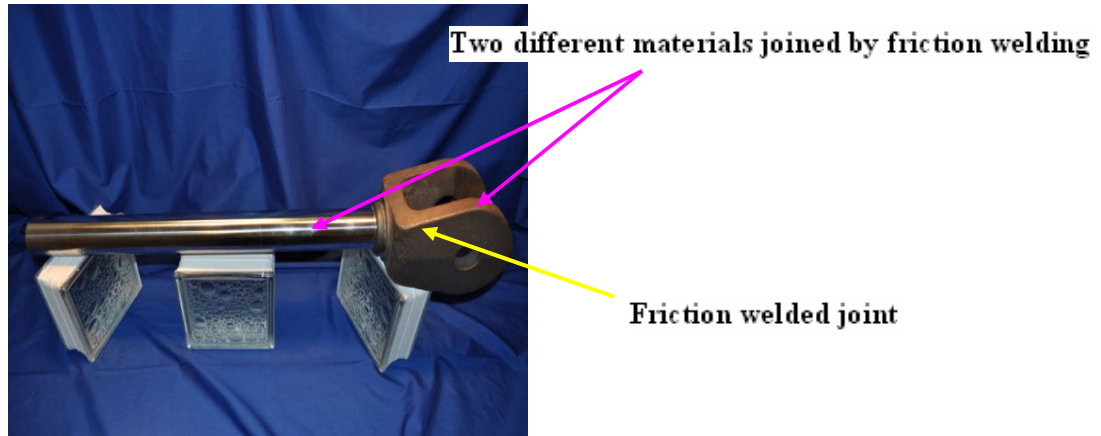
Hydraulic shaft is welded by using two different materials ^[8]
